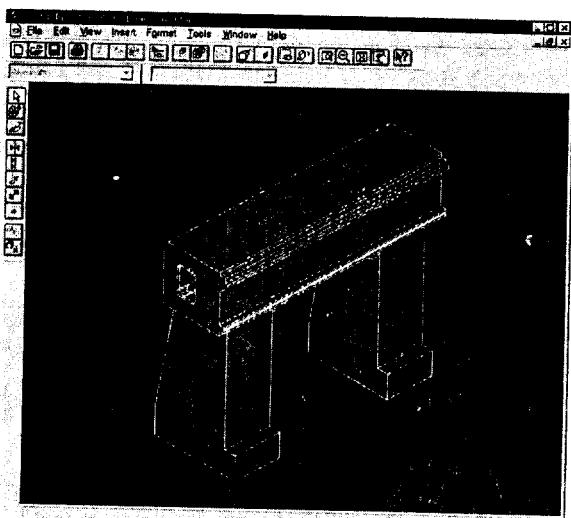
Modeling of cross-rail and columns of the NC piano miller machine
